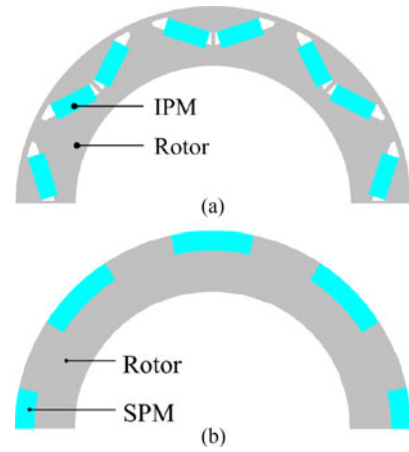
Rotors of benchmarks. (a) IPM rotor. (b) SPM rotor.
